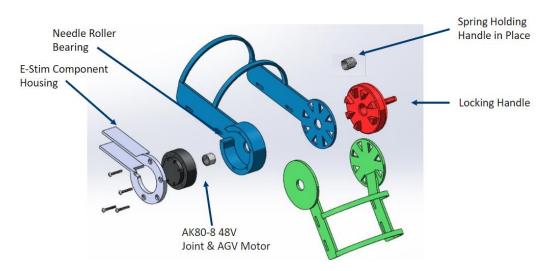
Improved CAD Prototype designed in SolidWorks. This is a more comprehensive view of how the device will work. It displays the motor, bearings, mechanical stops, and overall design shape.
